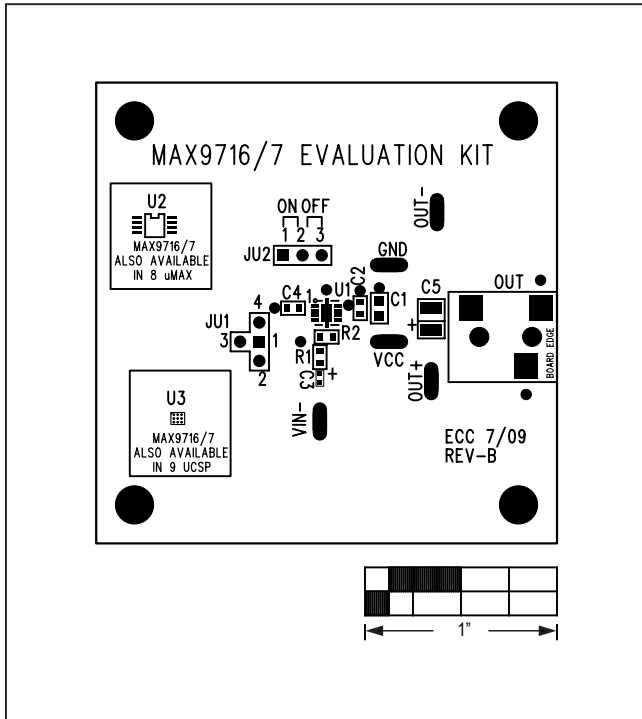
MAX9716 EV Kit Component Placement Guide—Component Side
